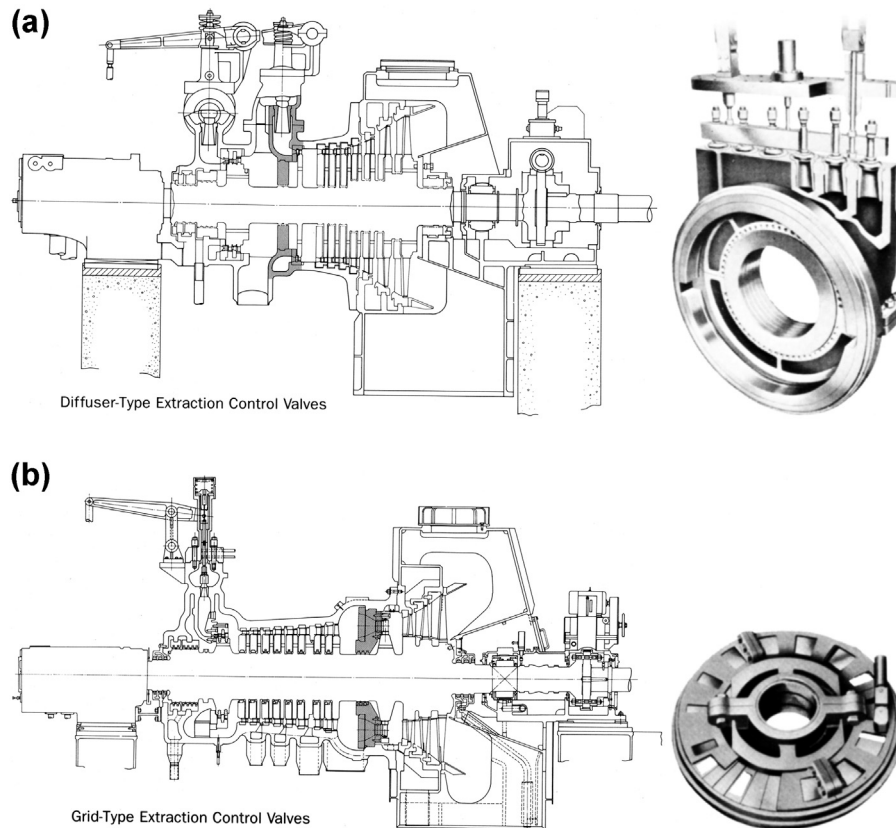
A–31 Extraction control valves: (a) diffuser type, (b) grid type [3-4].
